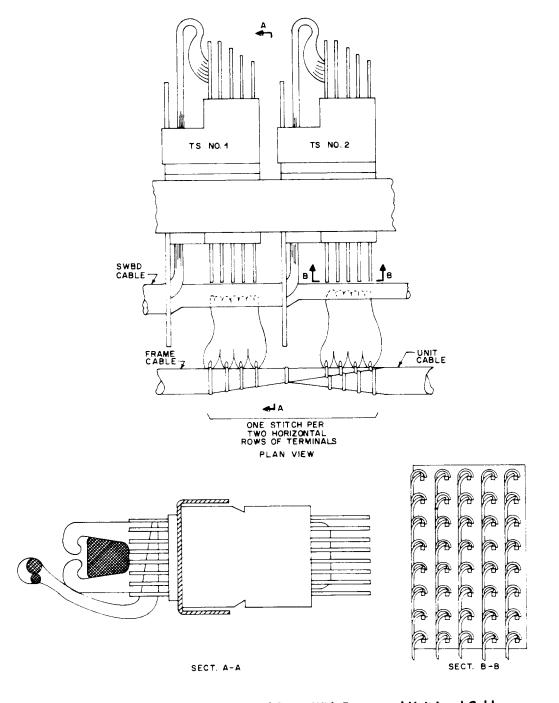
Two Adjacent D-Type Terminal Strips With Frame and Unit Local Cables
